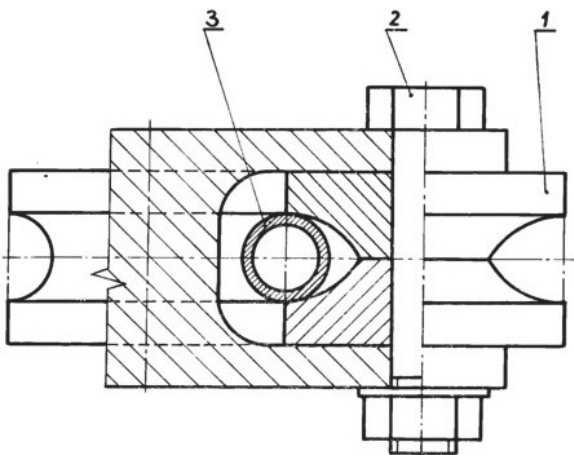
The developed small-radius tube bending die and the die recess contour – the description in the text
